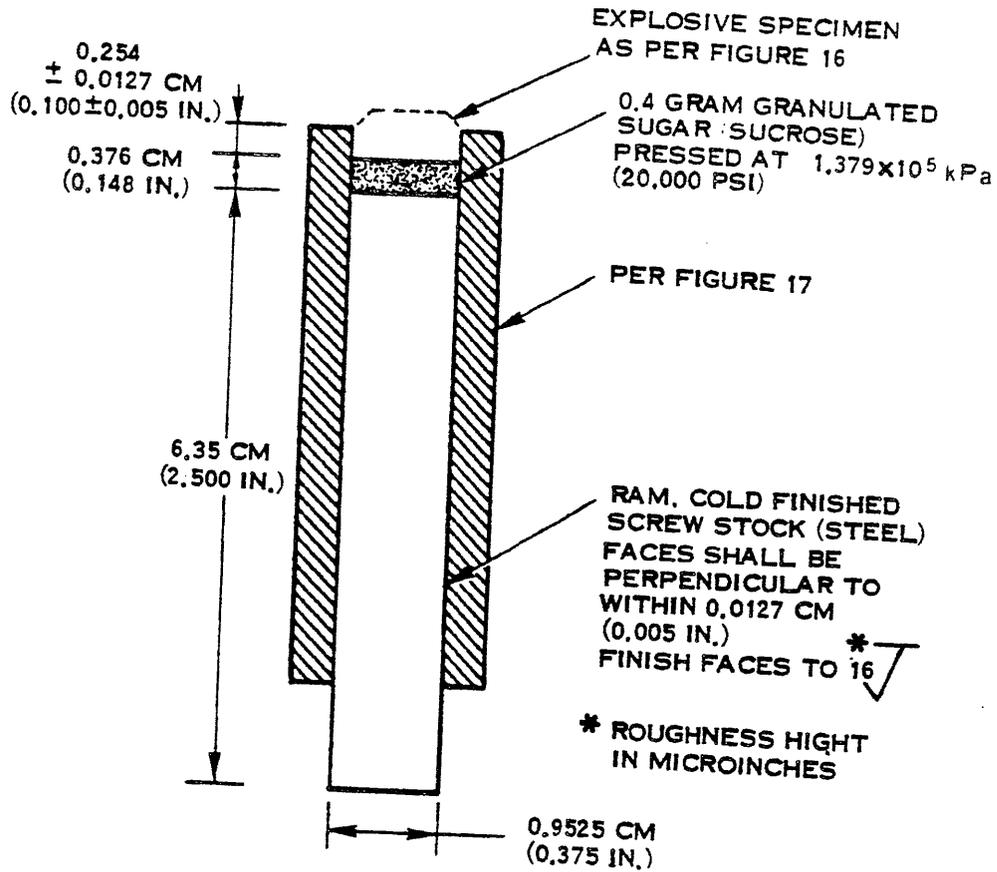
SPECIMEN HOLDER ASSEMBLY
